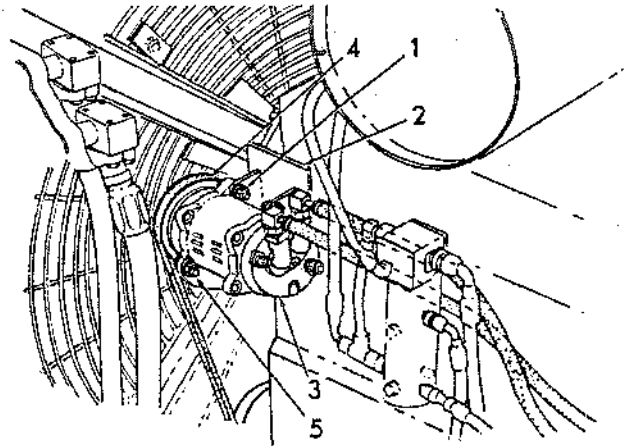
COMPRESSOR BELT ADJUSTMENT
